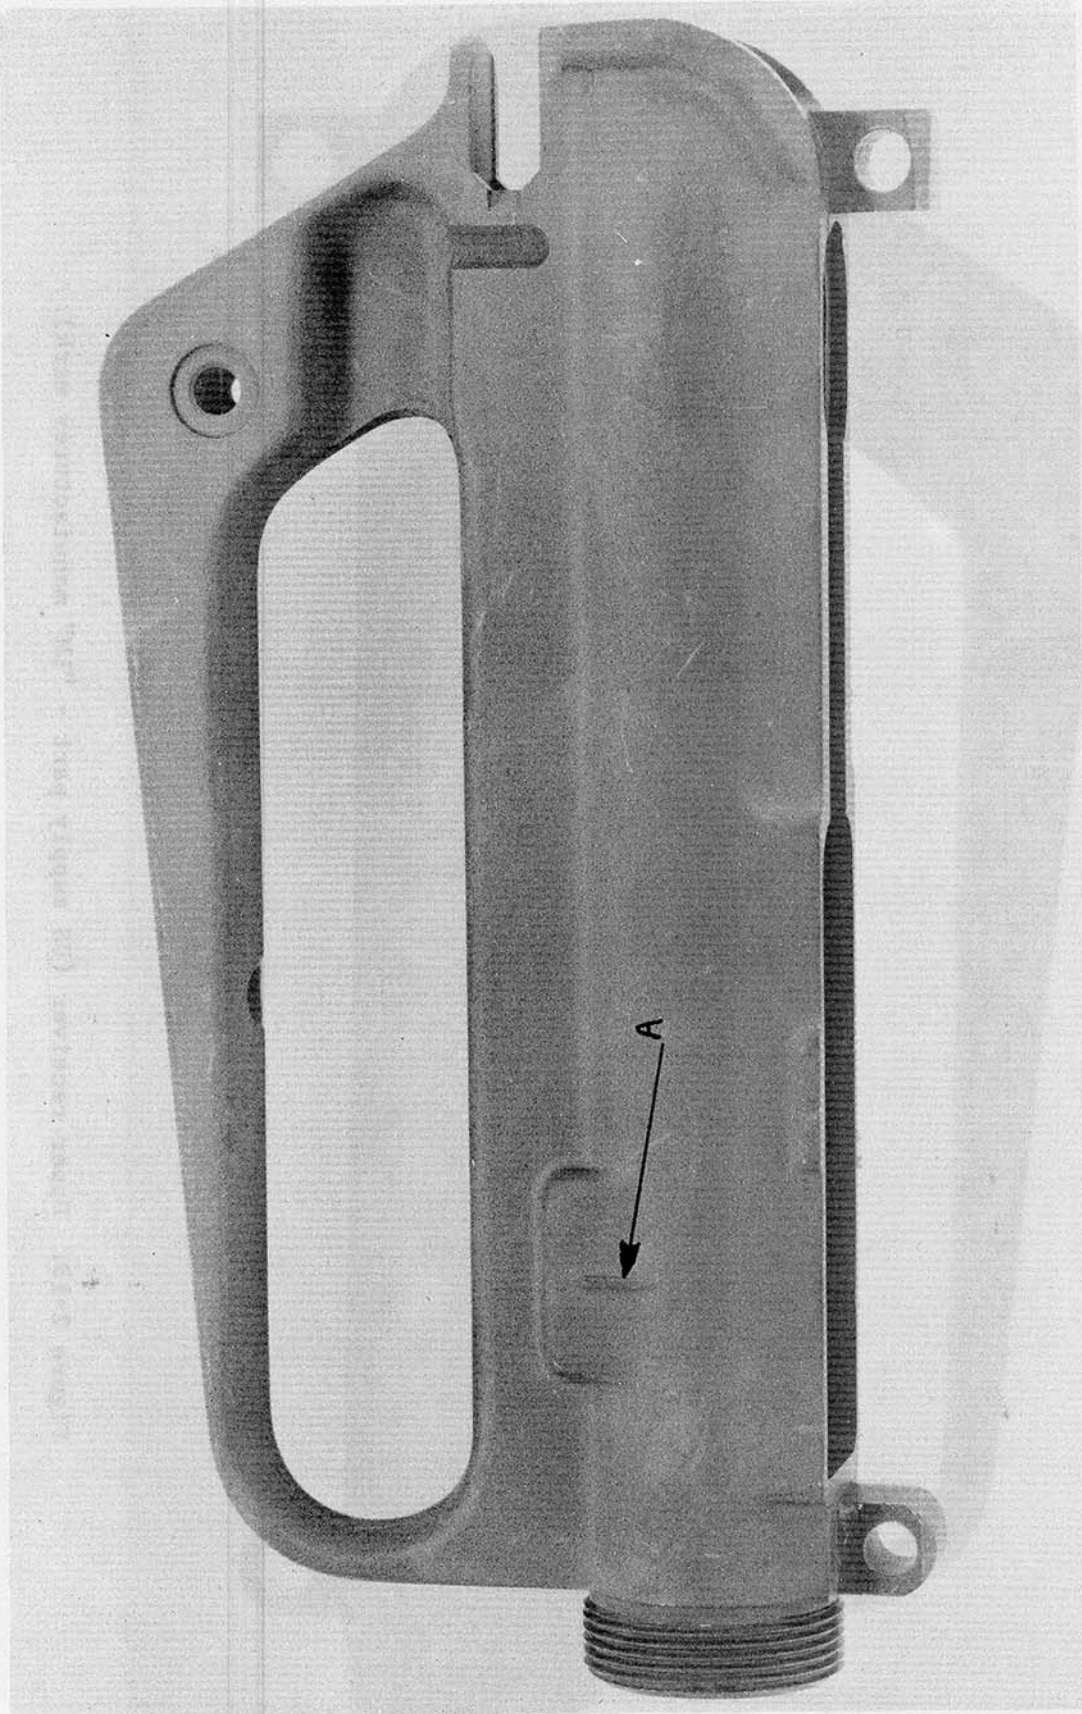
Upper receiver (US supply part - "CH" manufacturer mark).
